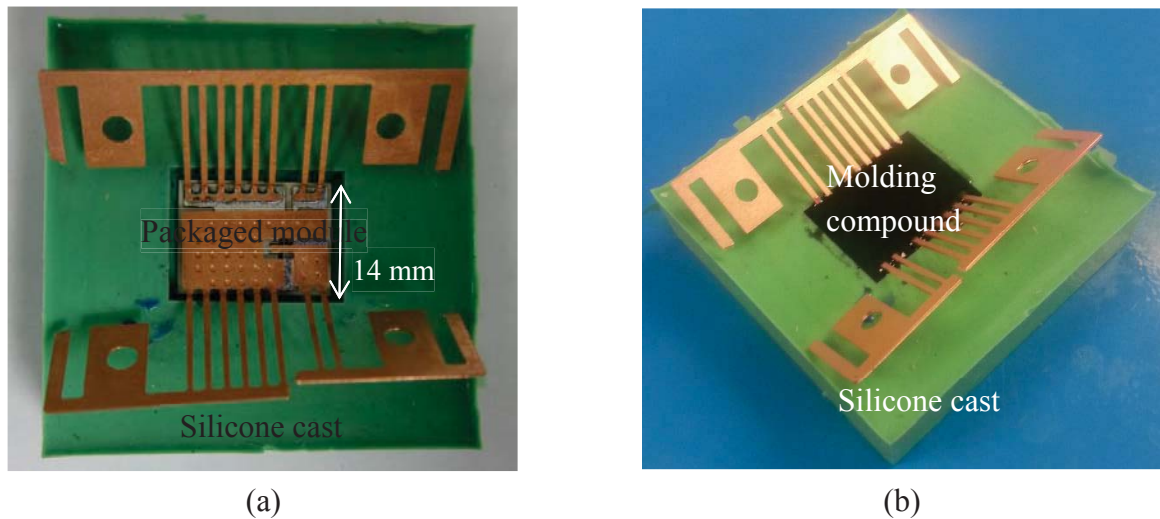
Encapsulation of the module using the process in Appendix B.3.D; packaged module in a silicon cast (a), and the cast filled with molding compound (b).
